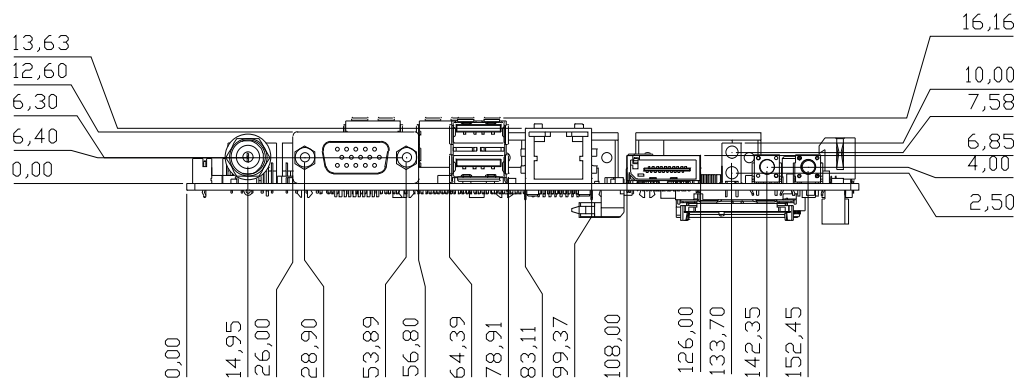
MIOe-DB2000 Mechanical Drawing (Bottom Side)
